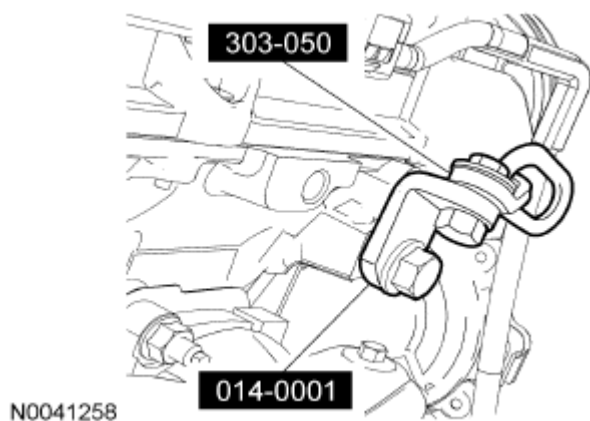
Lifting Bracket To Rear Of LH Cylinder Head
